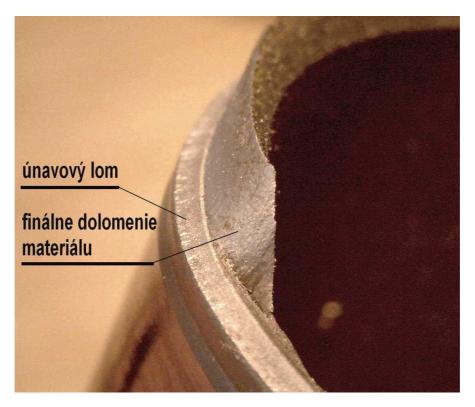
Side view of the area of final material rupture with visible steep inclination of fracture surface
